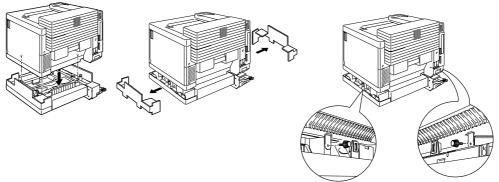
Insert the Metal Parts and Secure with the Screws
